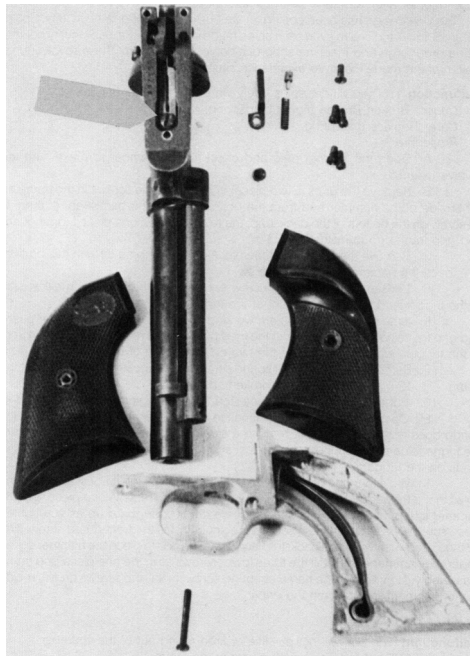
Single-action revolver; bolt/trigger spring assembled in action. Broken spring to right.
